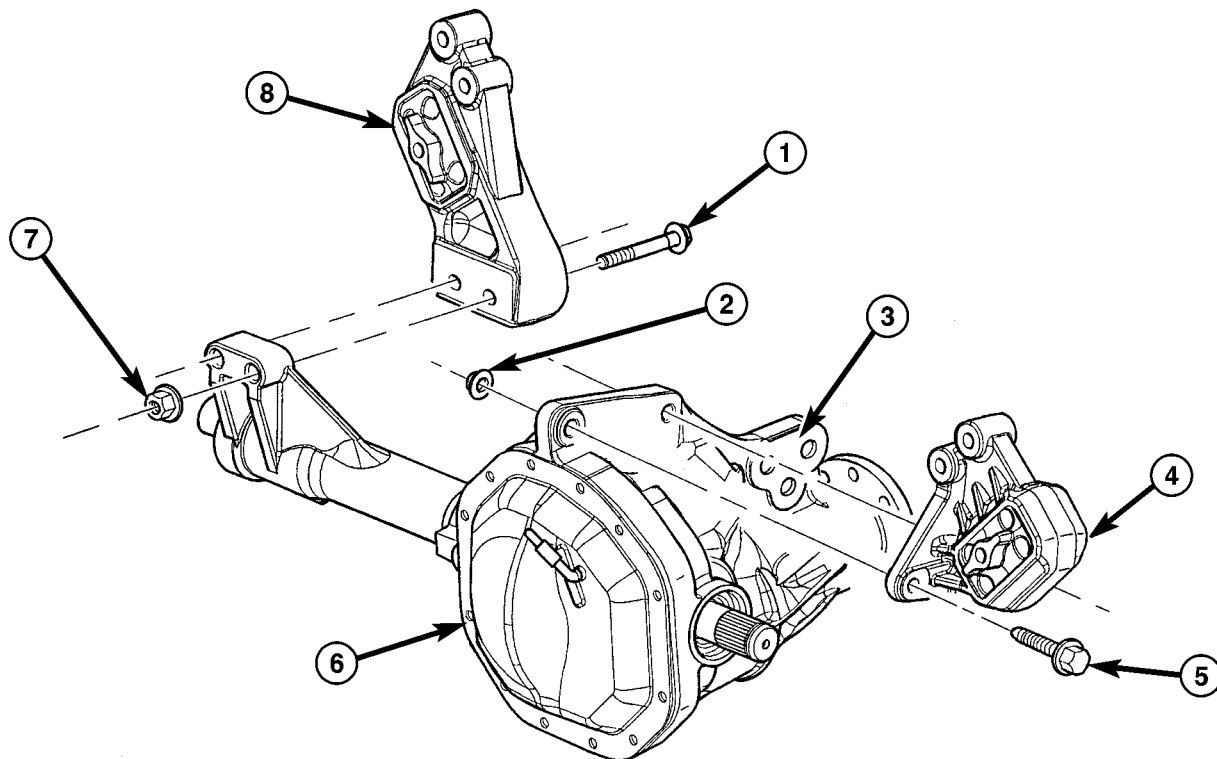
ENGINE INSULATOR MOUNTS 4X4
